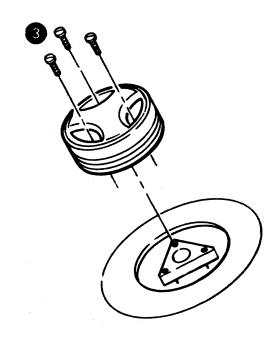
Reel Latch Assembly (Part 2517850) Removal and Replacement
